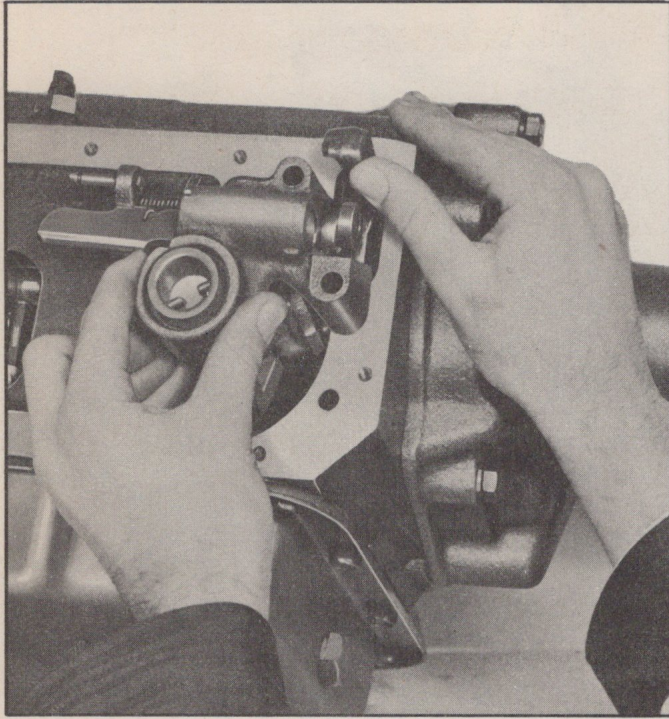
Removing Parking Brake Bracket and Parking Pawl
